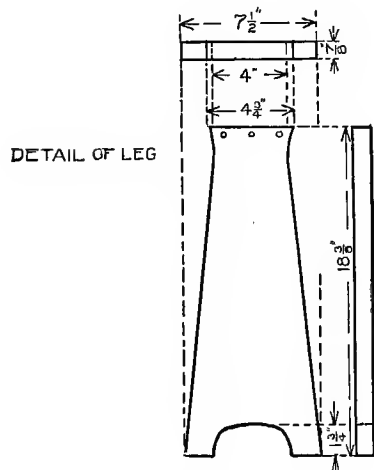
Mechanical Drawing of the Tabouret shown in Fig. 217
